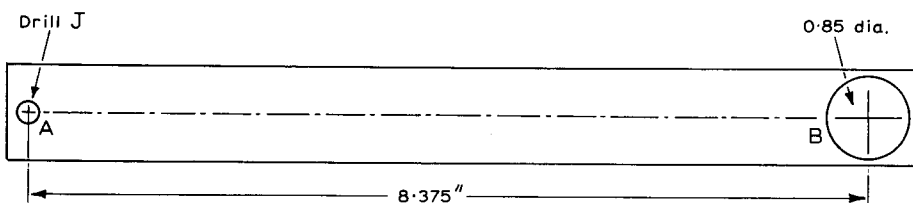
When turntable and pickup arm are assembled place hole A over spindle and hole B over pickup arm pillar. Draw round the base to mark selected position.
